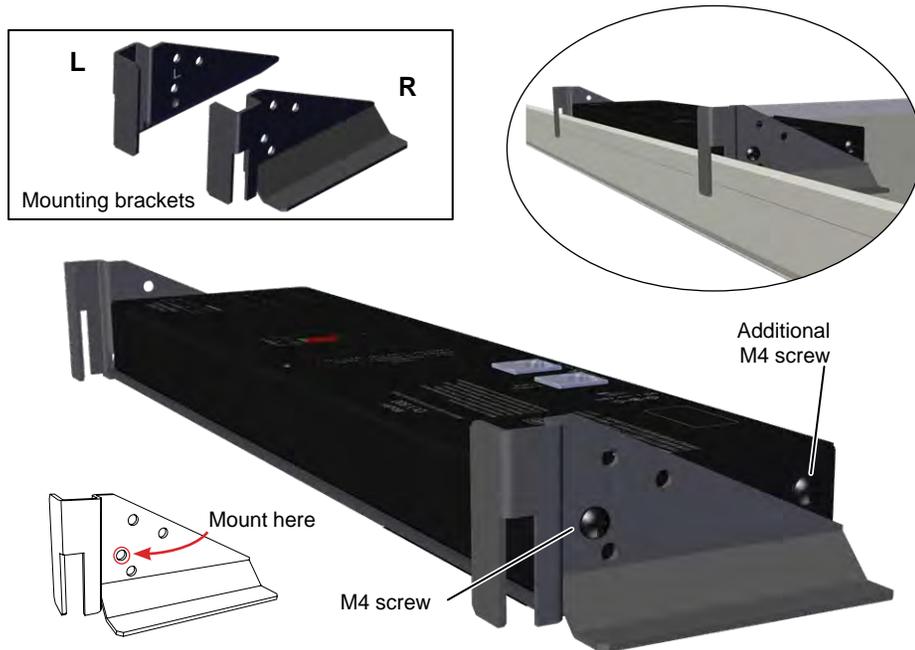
Controller is face down against the ceiling tile with an additional M4 screw on each side to prevent panel movement
